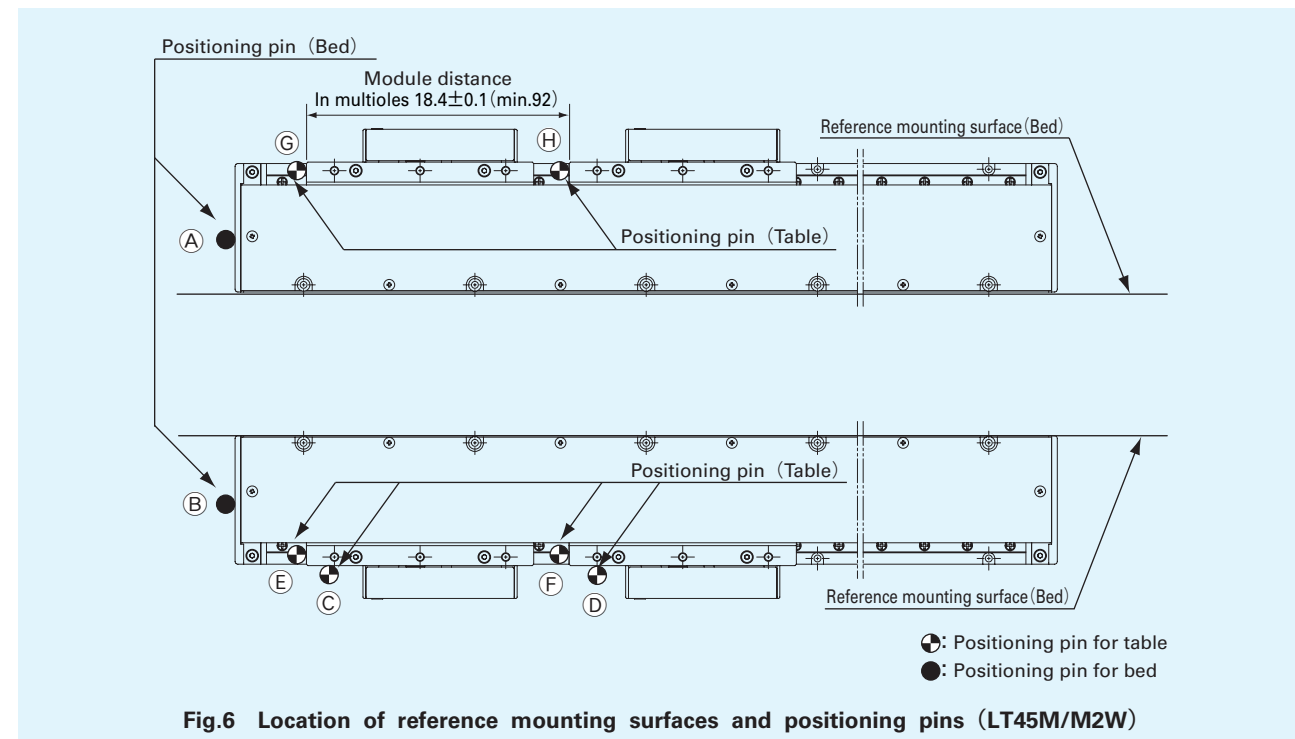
Location of reference mounting surfaces and positioning pins (LT45M/M2W)
